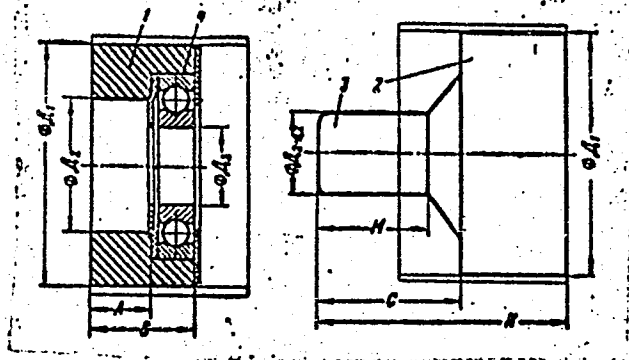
Device for friction welding of thin-wall pipes.
